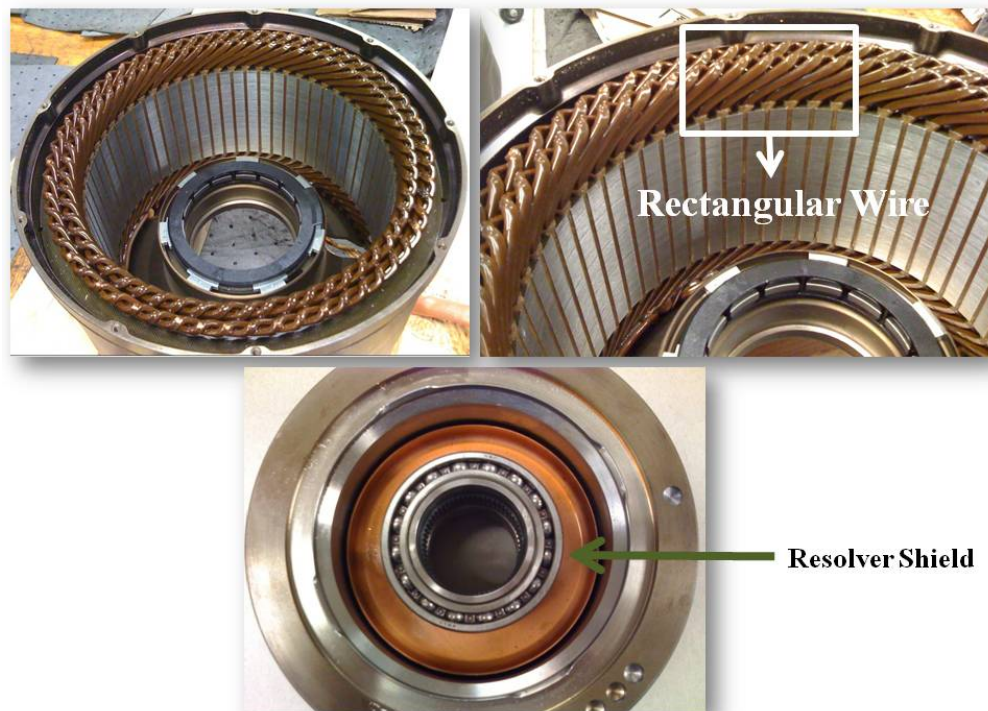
Drive Motor-Generator 2<sup>nd</sup> Position
